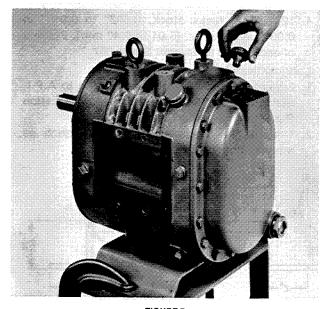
REMOVING BREATHER CAPS FROM GEAR END PLATE
